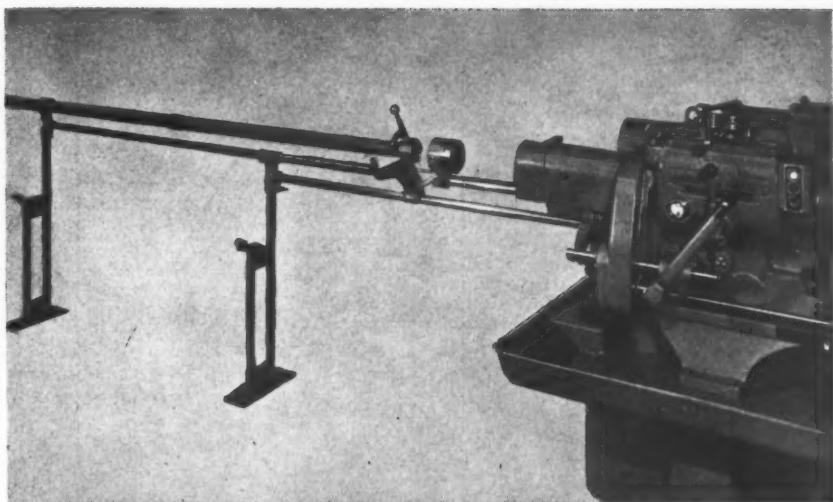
Welded Bar-feed Stand Shown in Fig. 5
